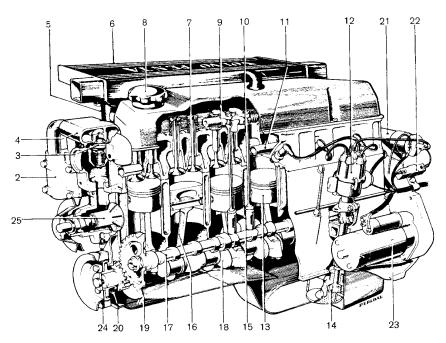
X-ray view of 6-cyl. engine, type AQ170
